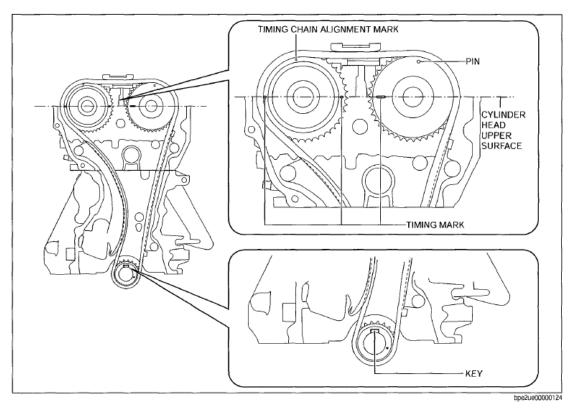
Identifying Timing Chain Alignment Marks On Cylinder Head Upper Surface
